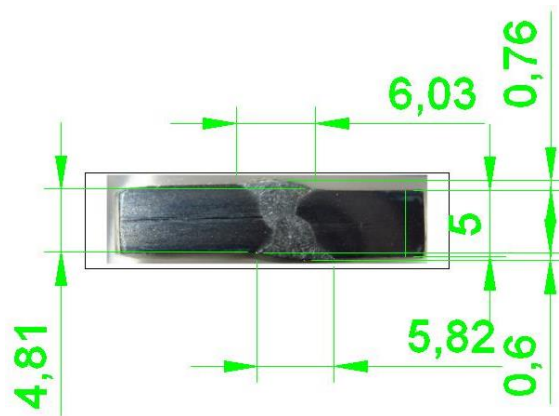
Sample of measured dimensions in weld joint ATIG-B2
